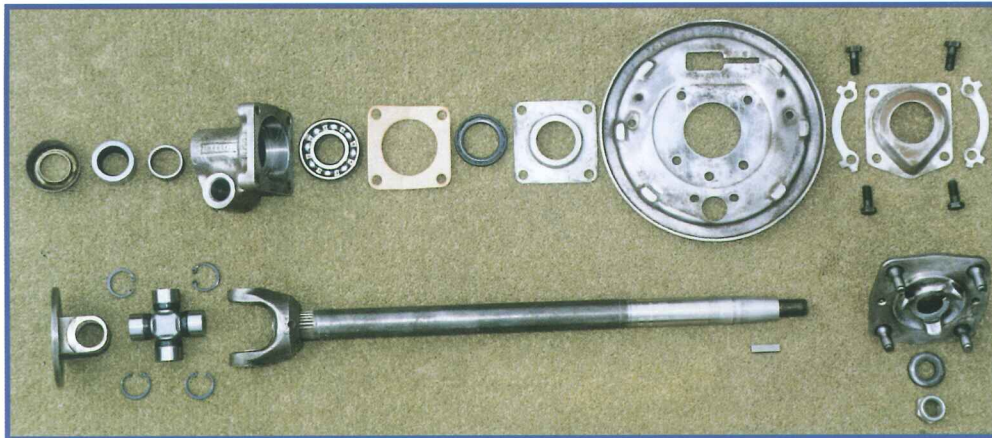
Shown here are all the components ready for reassembly onto the halfshaft. Cleaning all the components prevents you getting dirt into the new bearings during reassembly.
